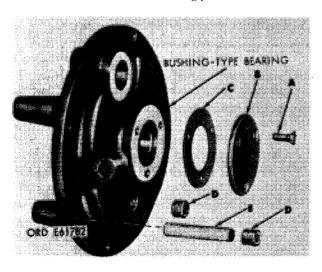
Disassembling or assembly commutator end housing assembly.
